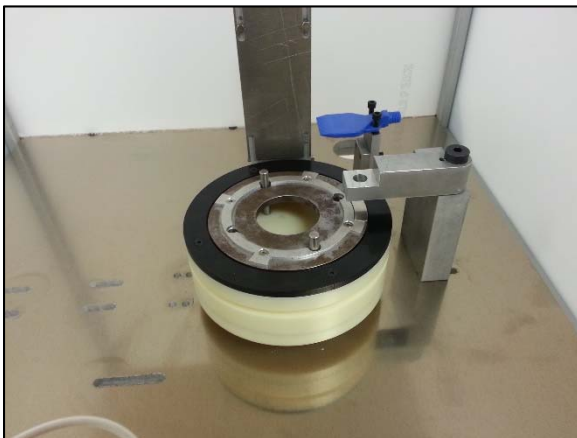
Bearing, nest, magnet housing, checker arm assembled
